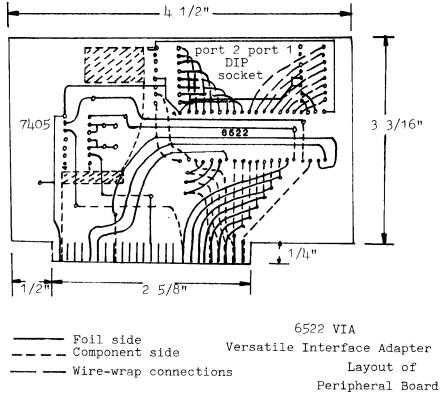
Assembly layout of the peripheral board for the 6522 VIA.
